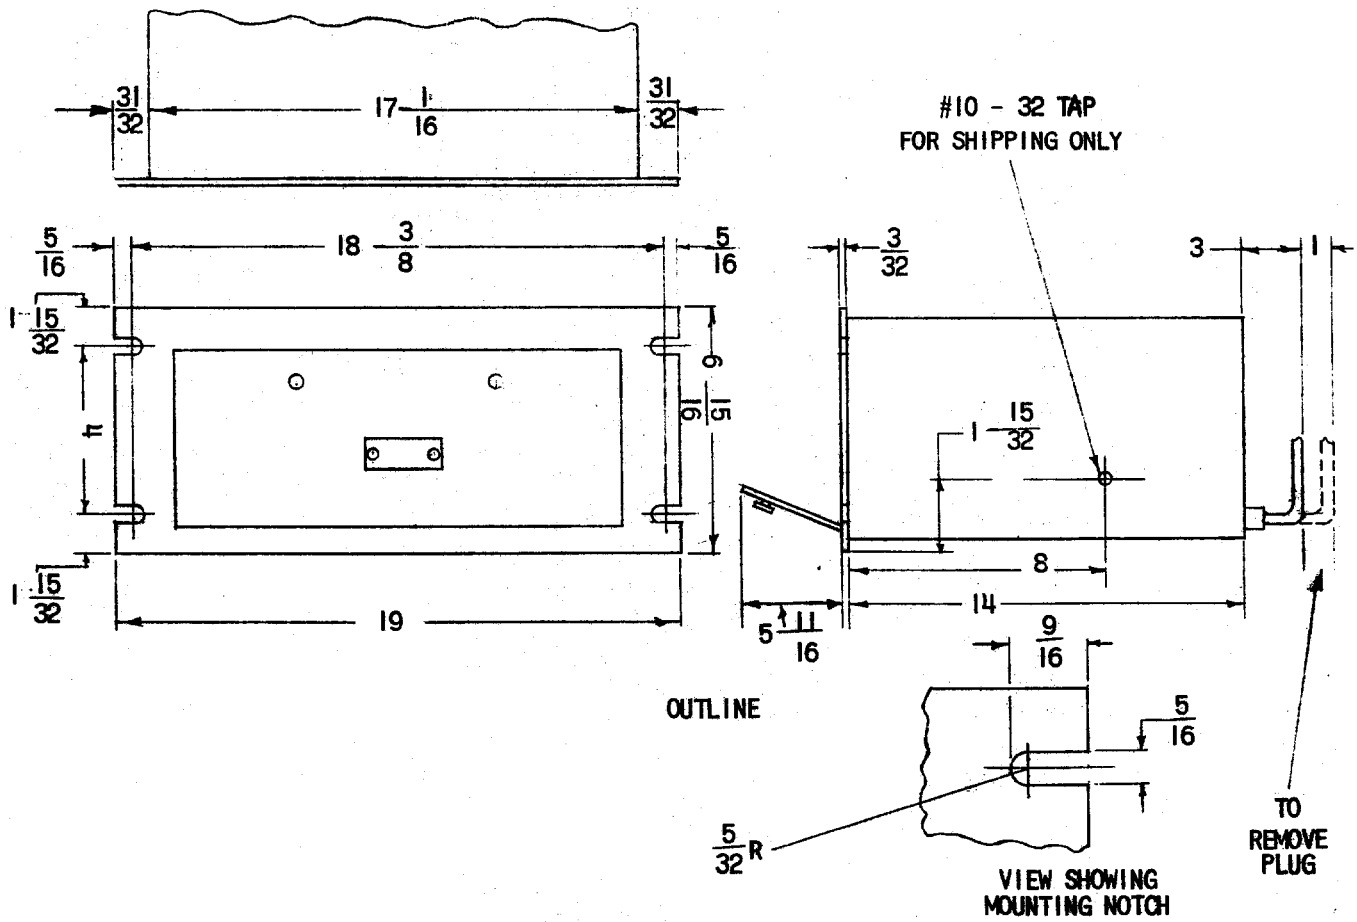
(0227A2037-0) OUTLINE AND MOUNTING DIMENSIONS FOR THE TYPE SLAT53A
